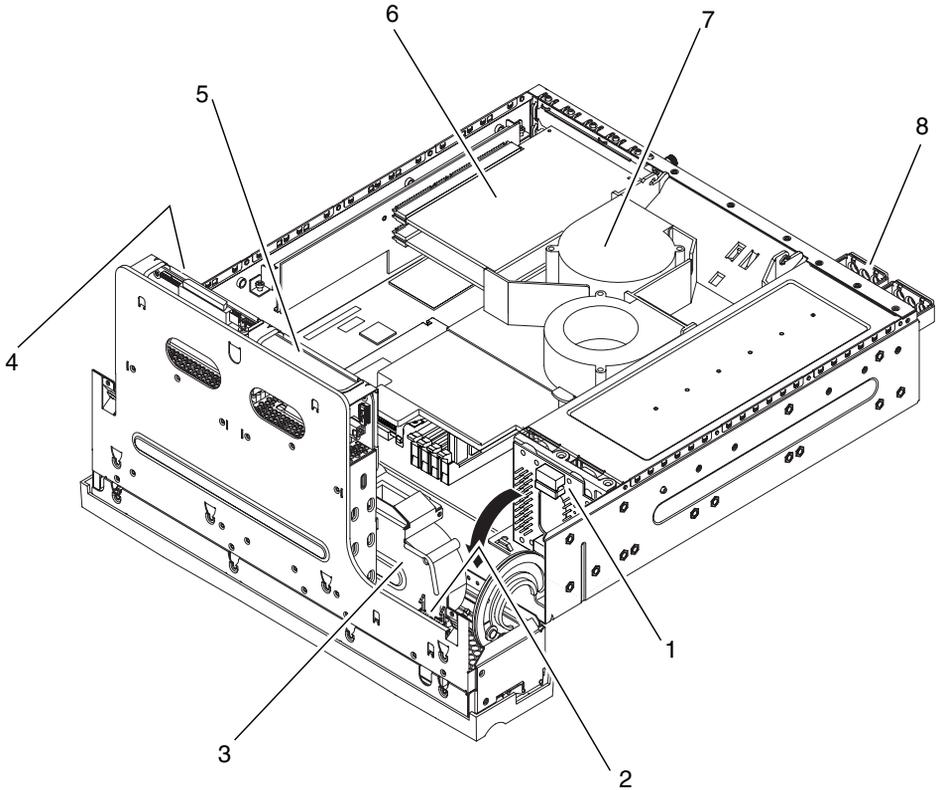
Rotating Service Module, Internal and Rear Panel Components
